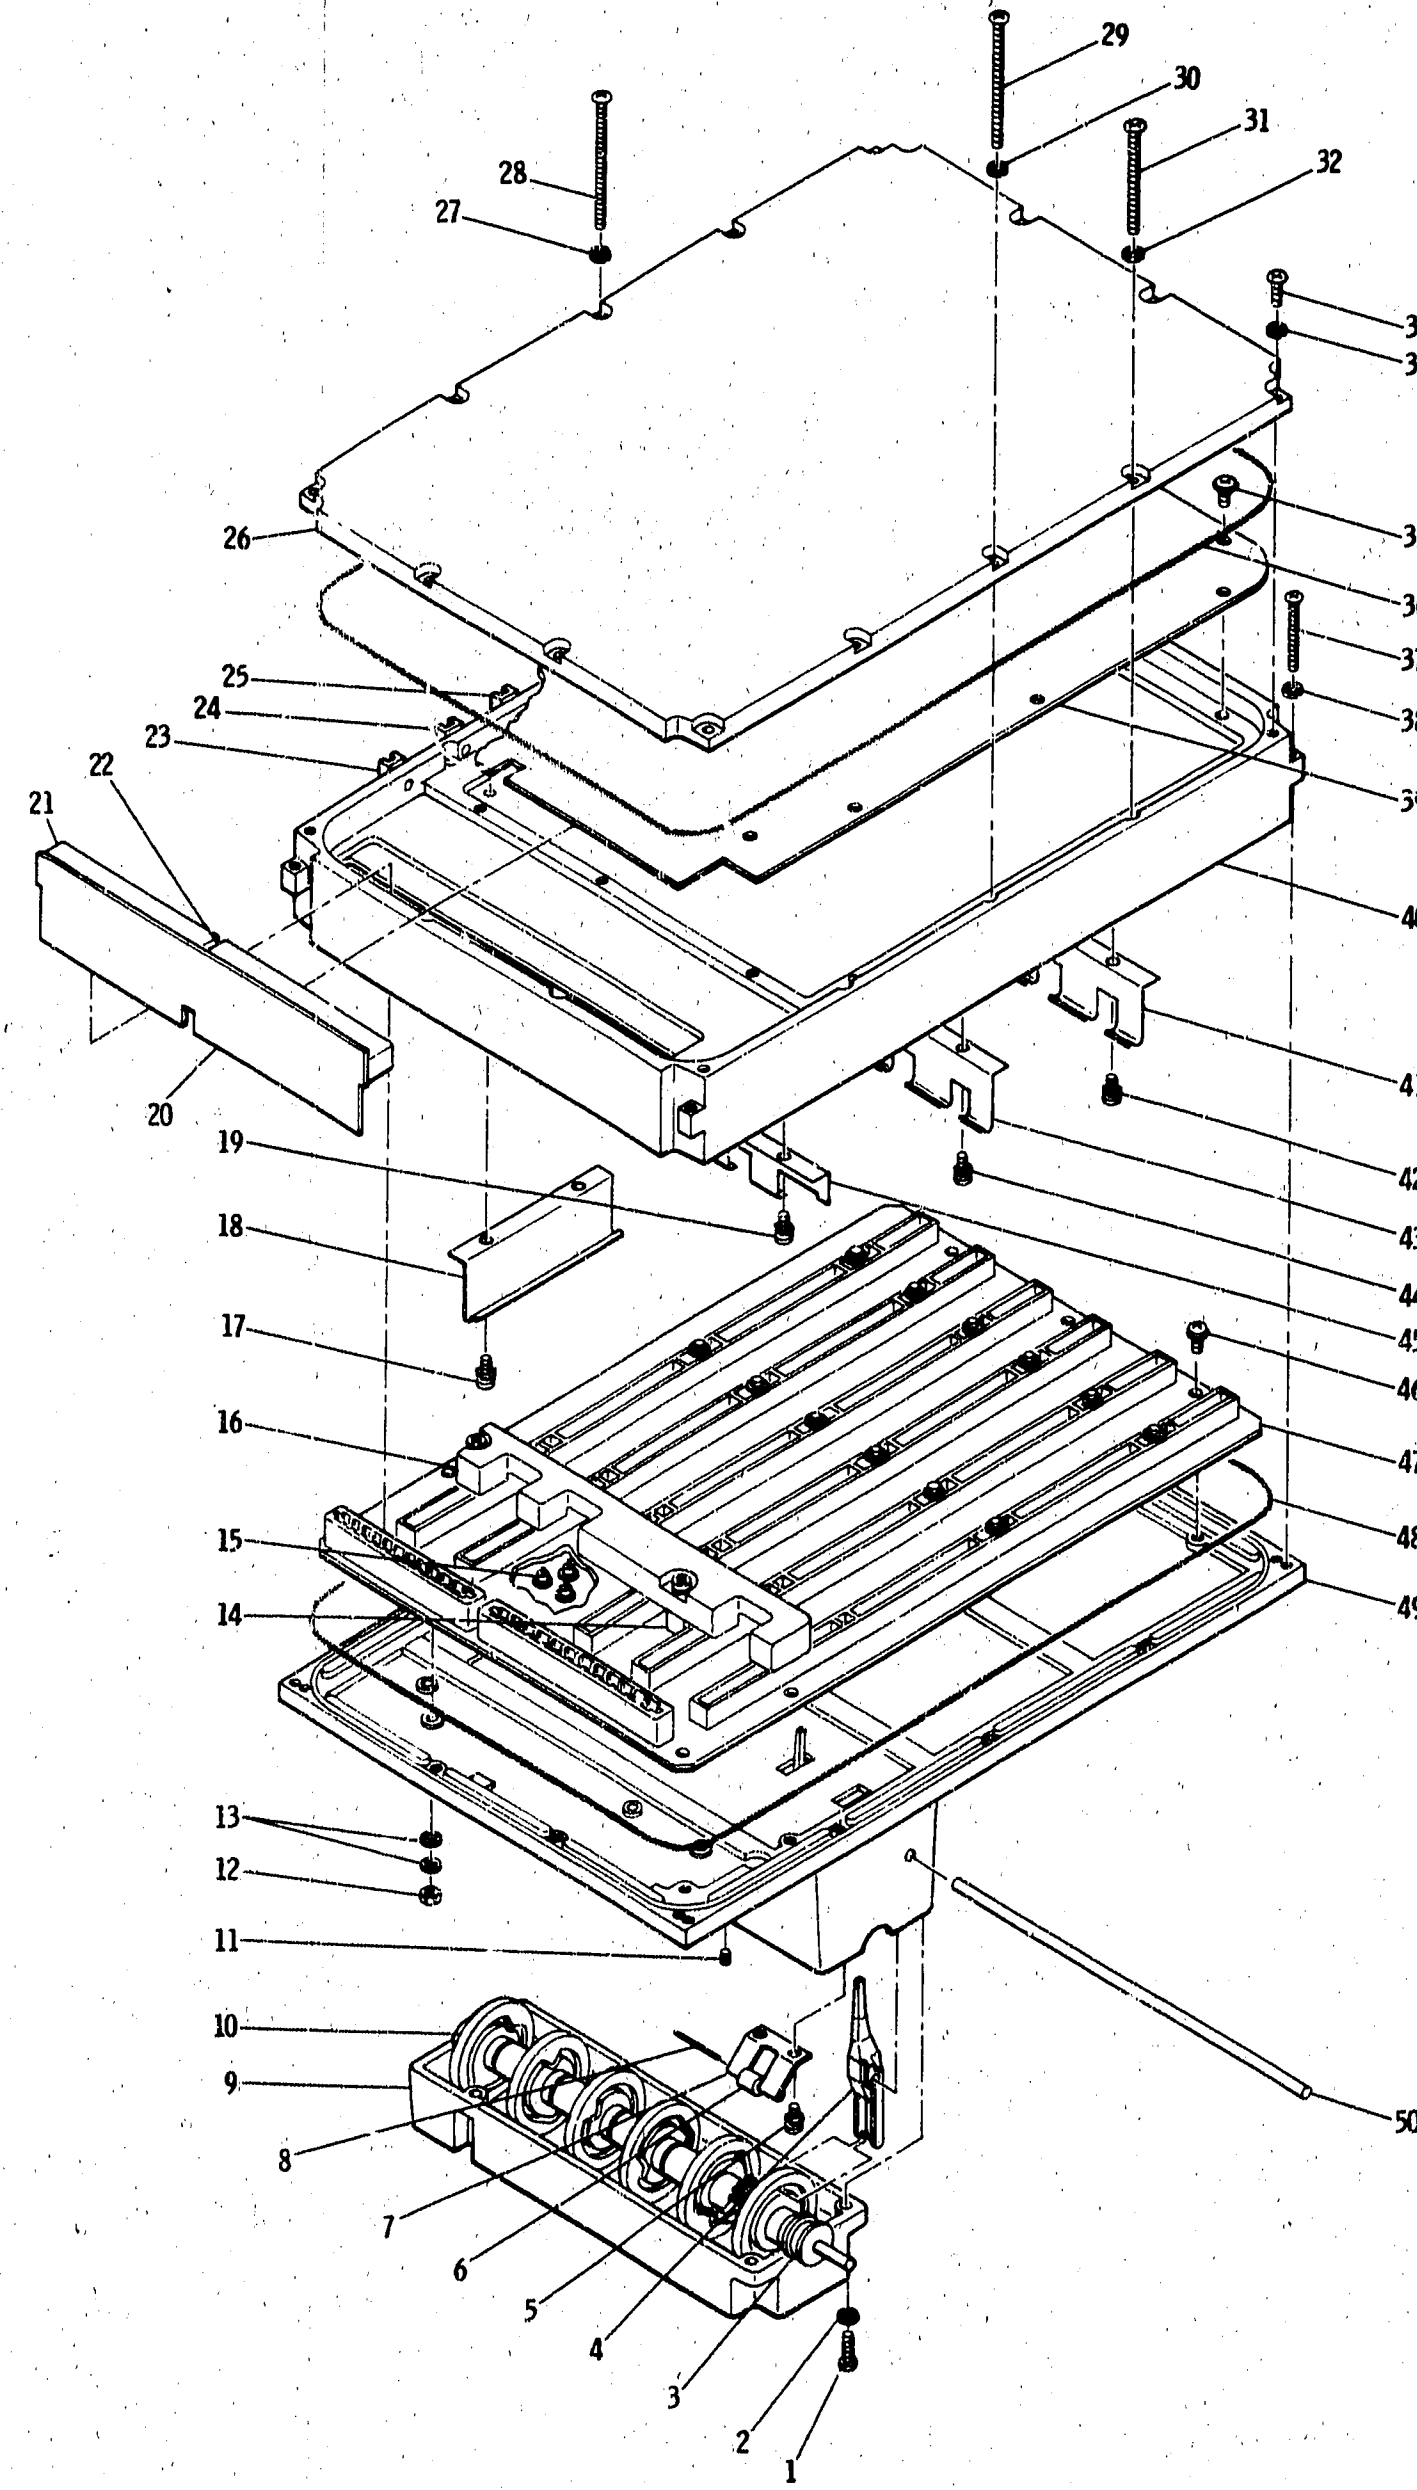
A10 Divider/Filter Assembly Illustrated Parts Breakdown
